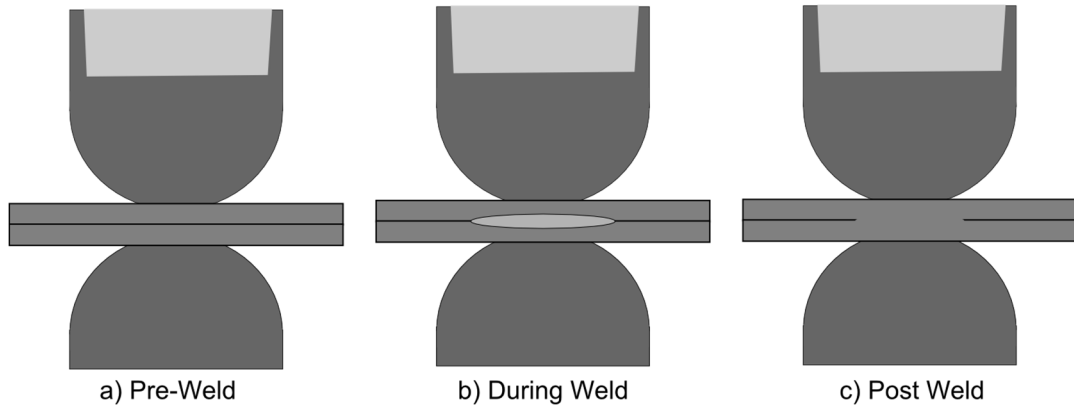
A depiction of the spot weld process at the various stages, prior to welding, during welding and post welding. At the end of welding a fused region is visible in the middle of the stack-up.
